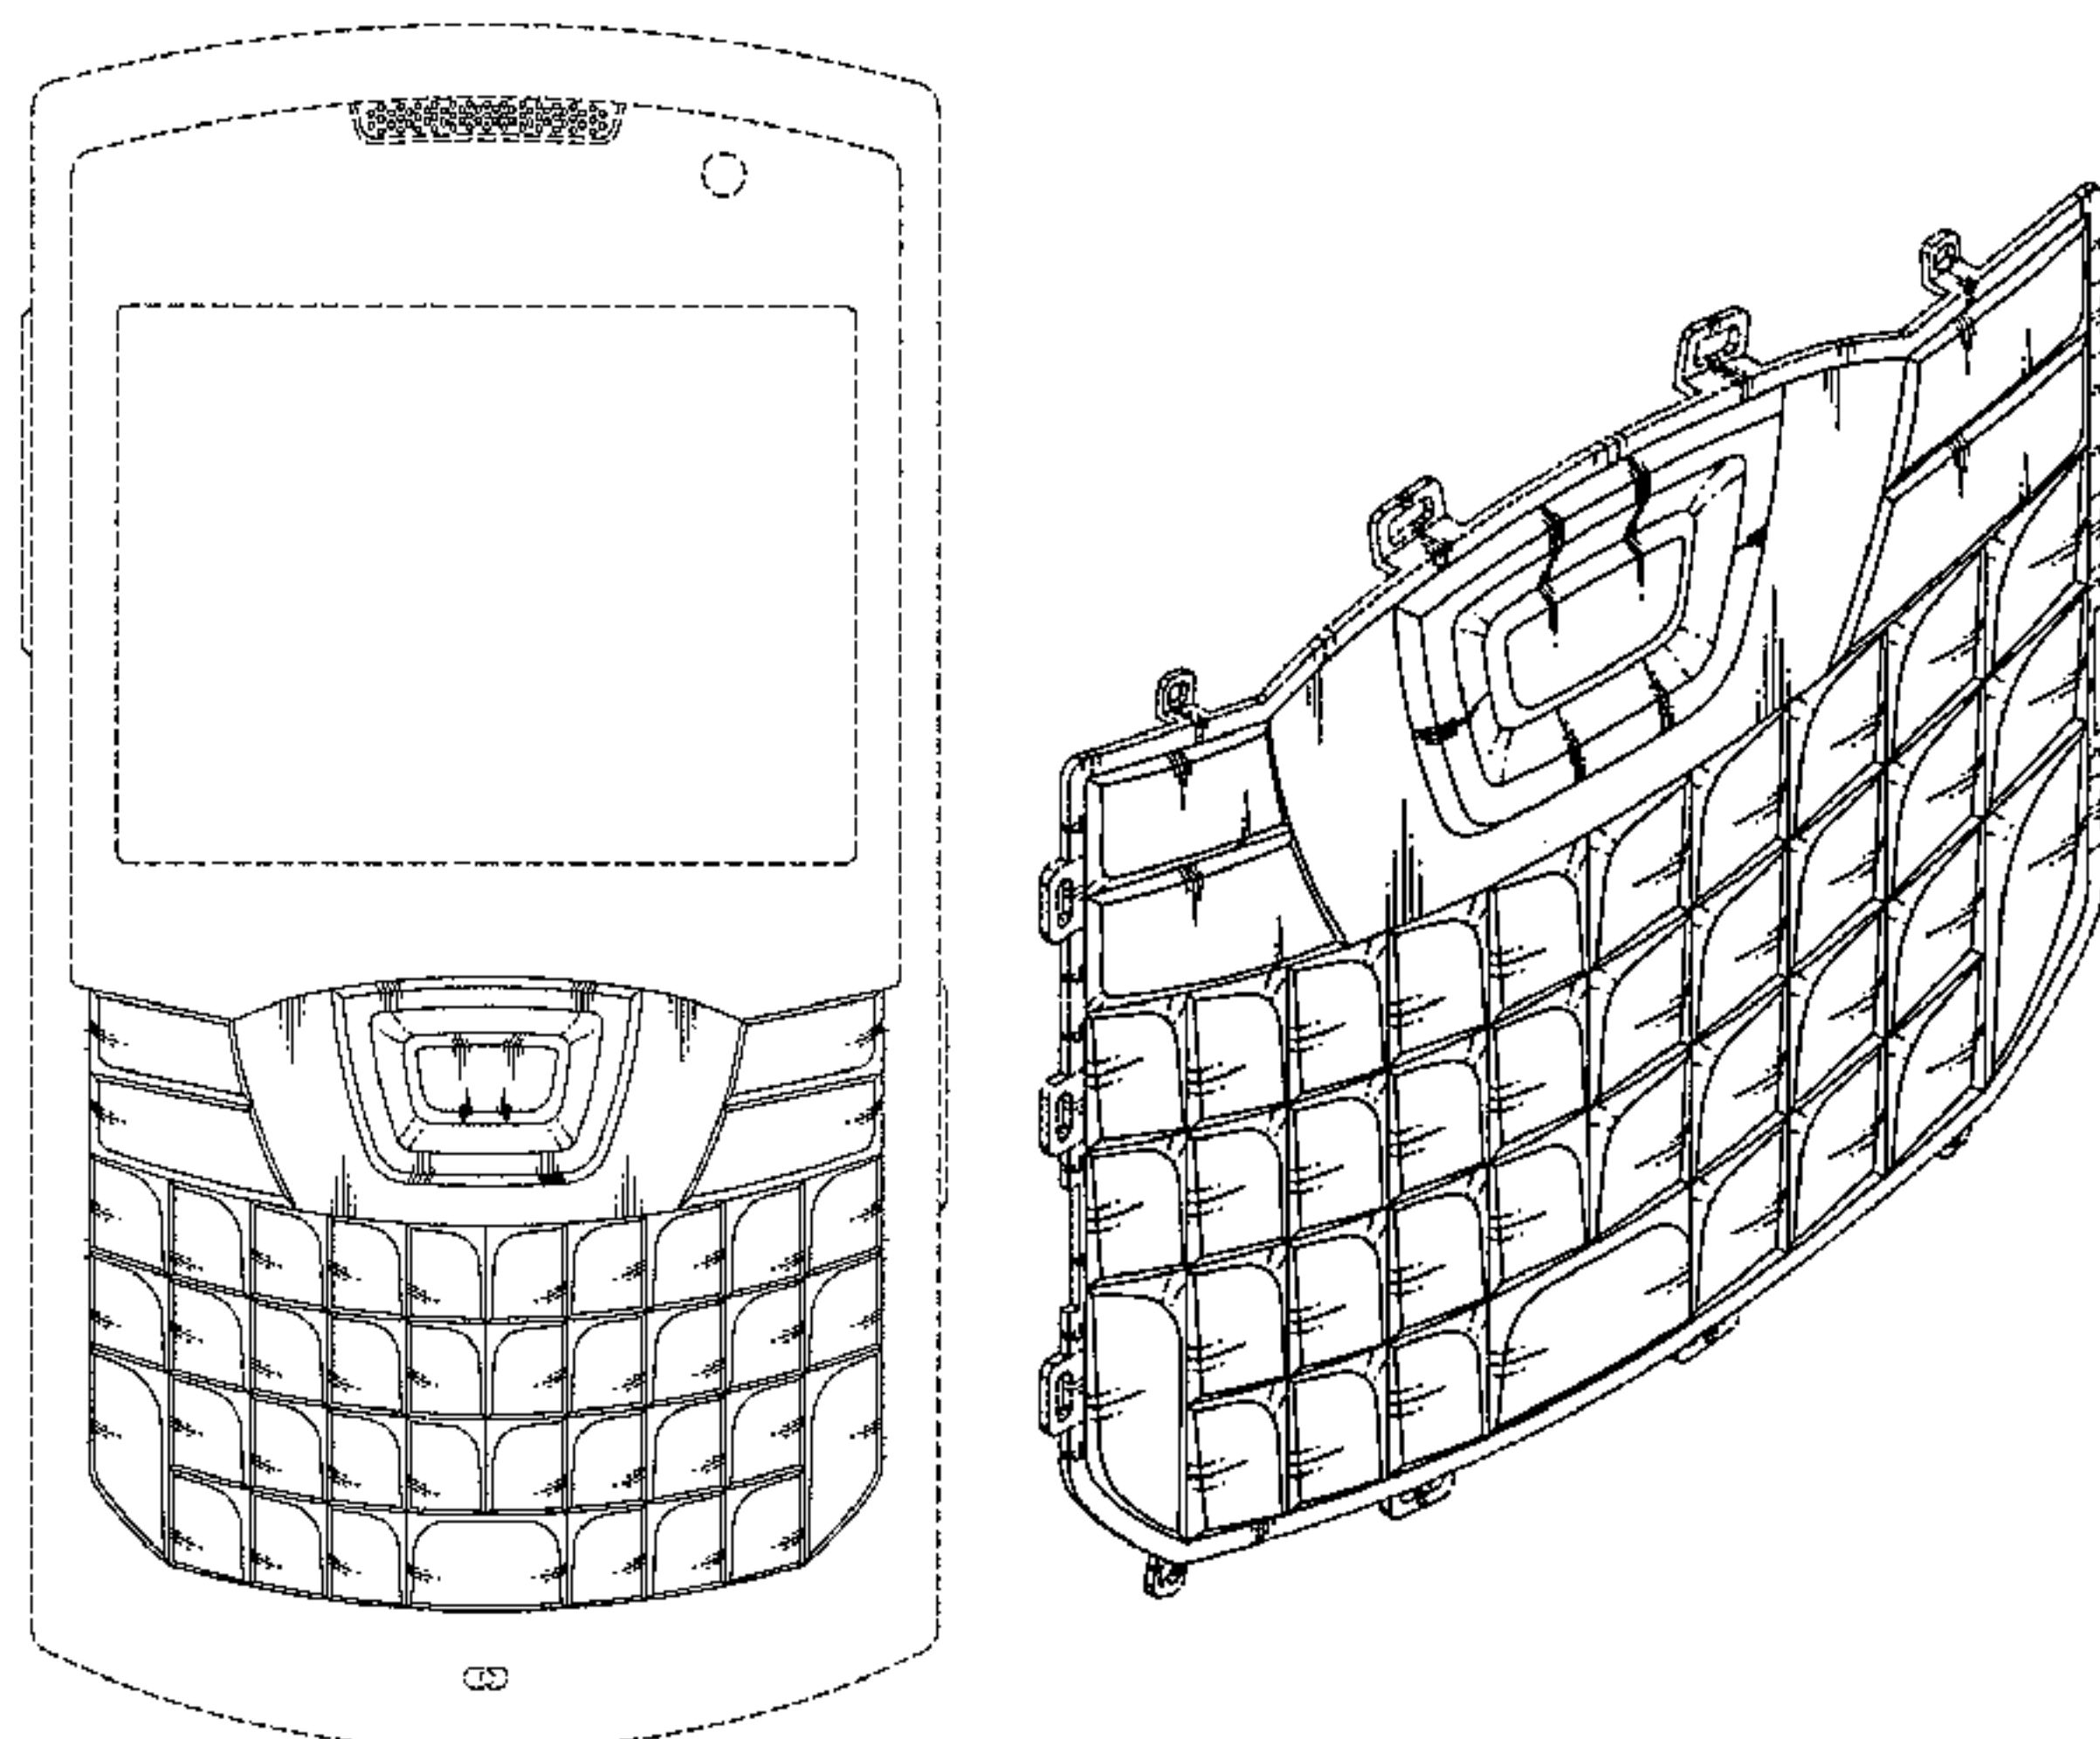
is a top plan view of the keypad for mobile phone of FIG. 1;
